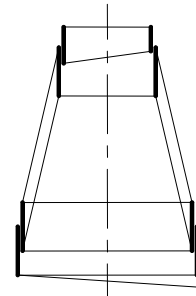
Drawing ignored spring coils with thin continuous lines
